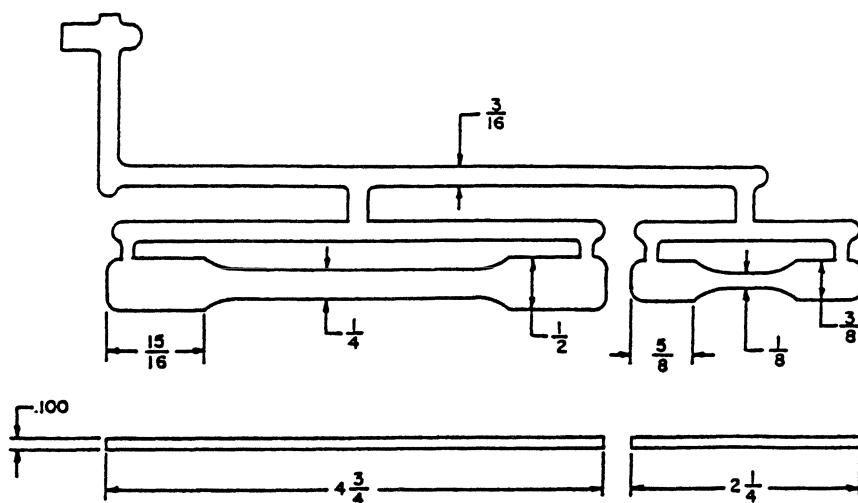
Mold configuration used for producing tensile-impact (right) tensile specimens with weld lines.
